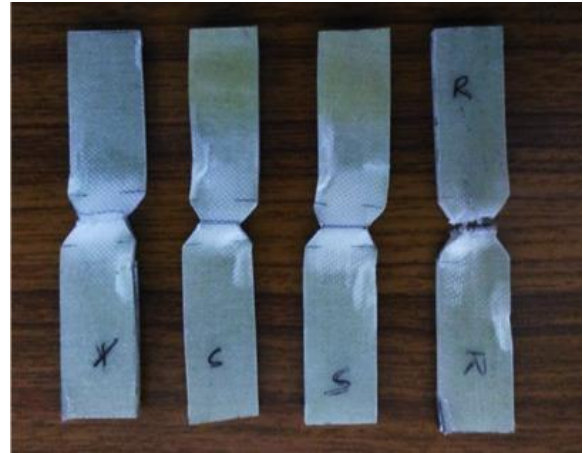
Fractured test specimens after performing Iosipescu shear test
